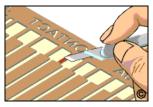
Scrape off the bonding film from solder joint area on the back side.
